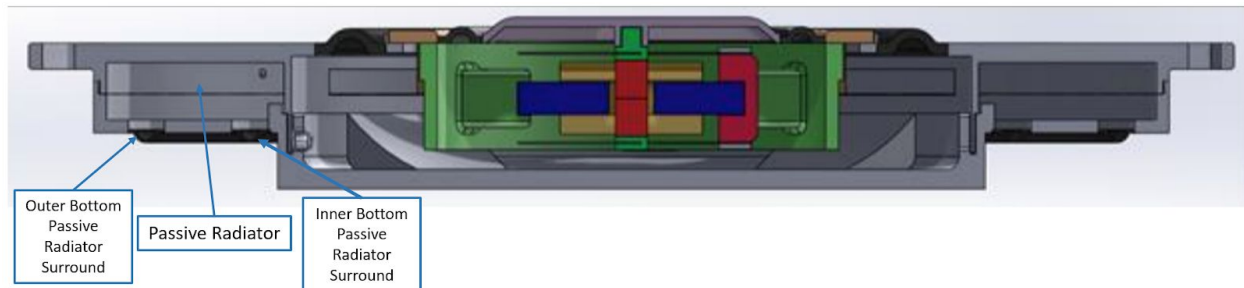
Low-Profile Sealed Passive Speaker Cross Section
